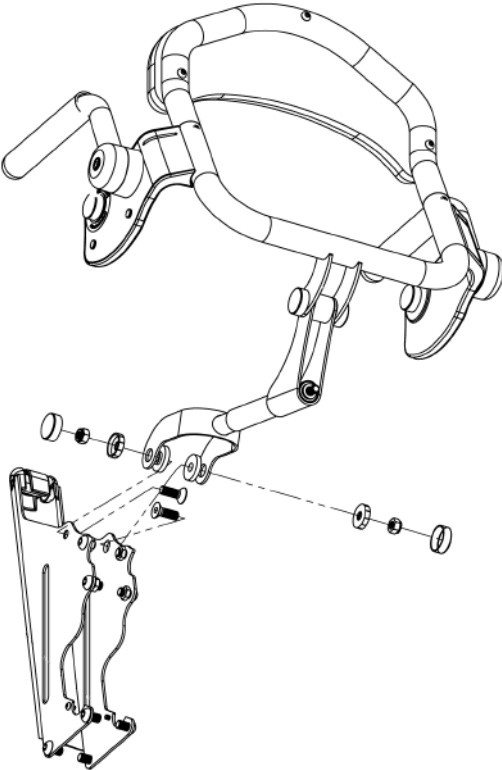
Remove the bolts from the pump handle and install it onto the pump on the main frame and tighten securely. Insert top of handle into pump handle and tighten securely.
